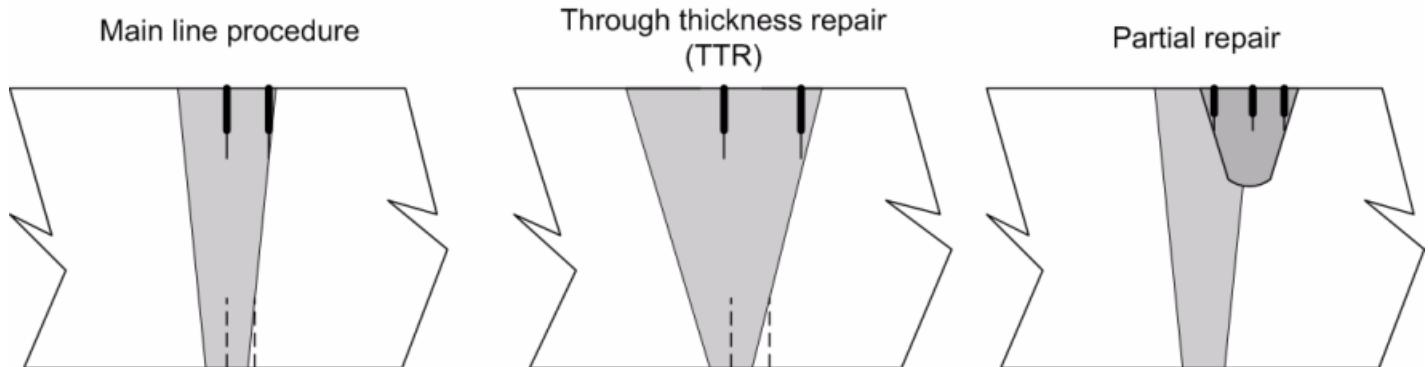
Illustration of typical notch positions for fracture toughness testing of girth welds
